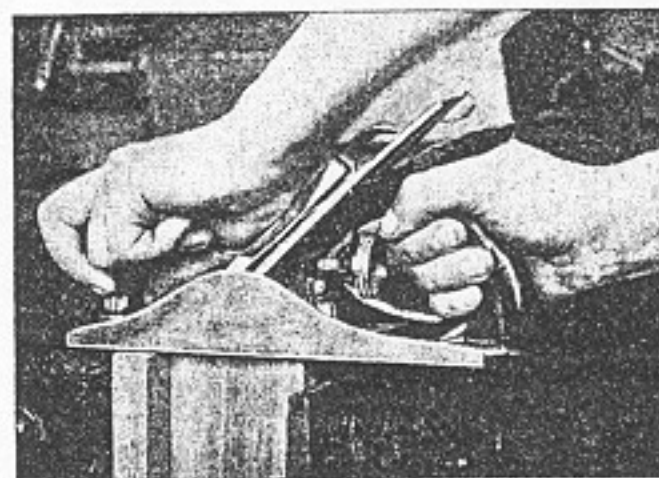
Planing end of narrow board. Board placed behind it prevents splitting.
